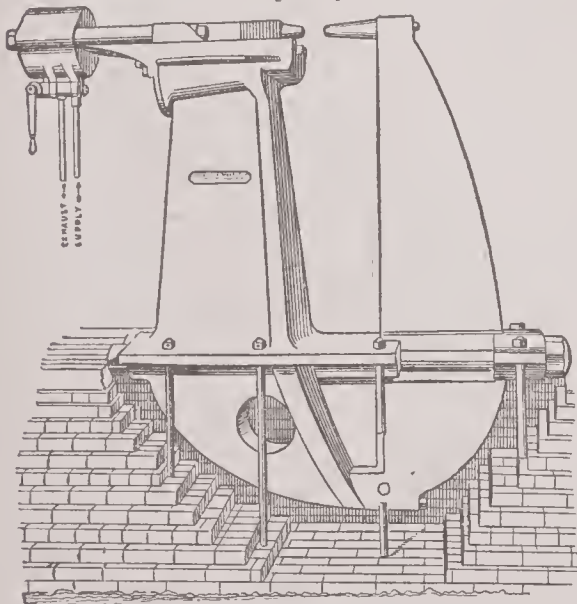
A HYDRAULIC RIVETING MACHINE.
